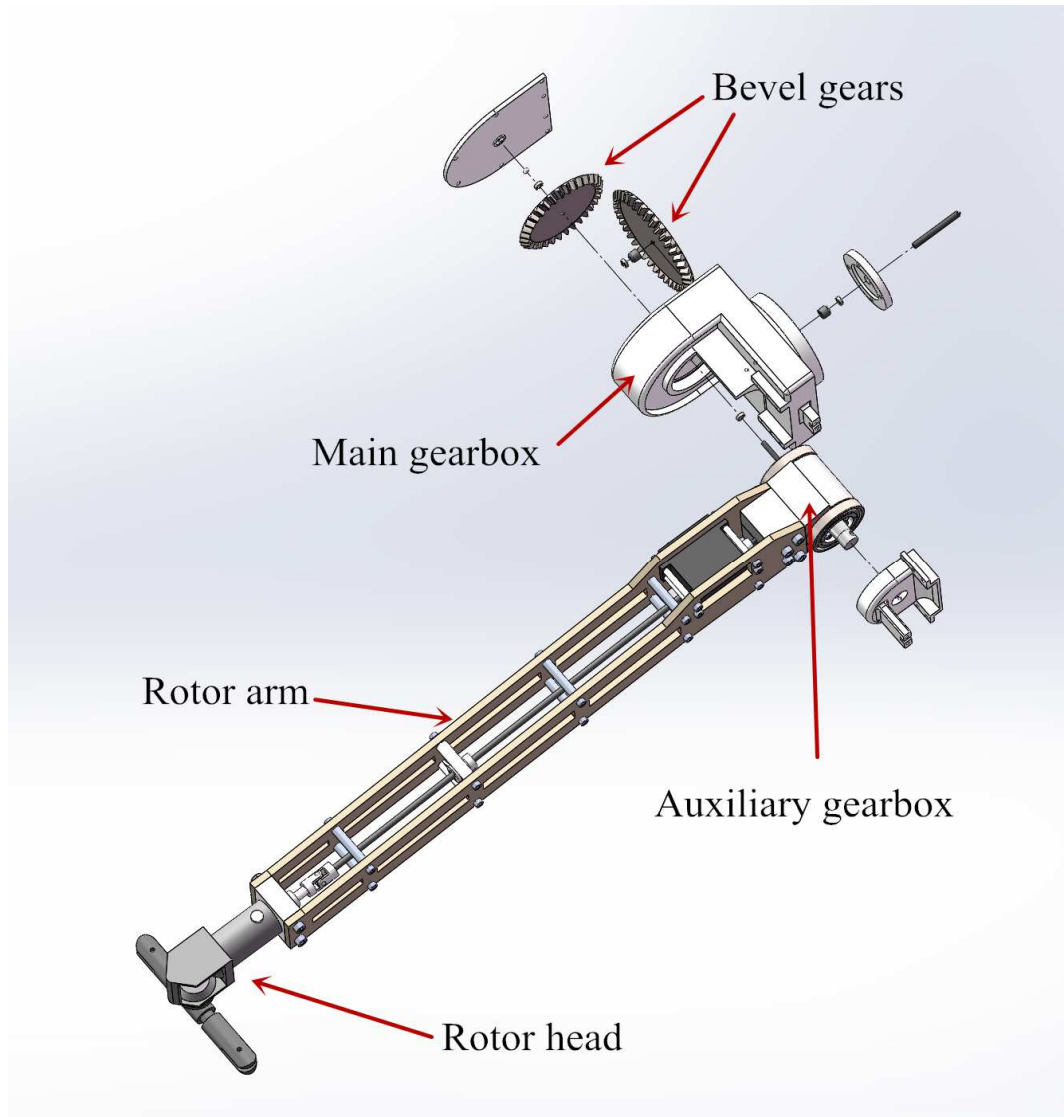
The assembly process of the main gearbox and auxiliary gearbox with rotor arm.
